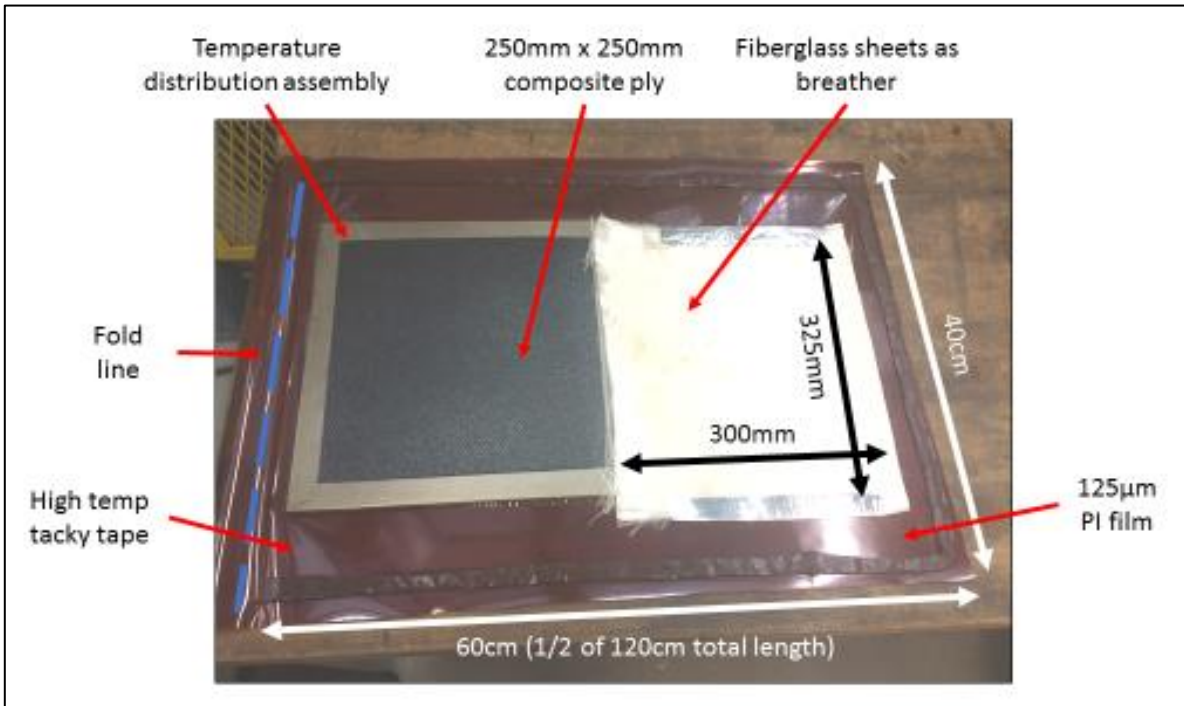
Vacuum bag assembly – 0.5bar embedding
